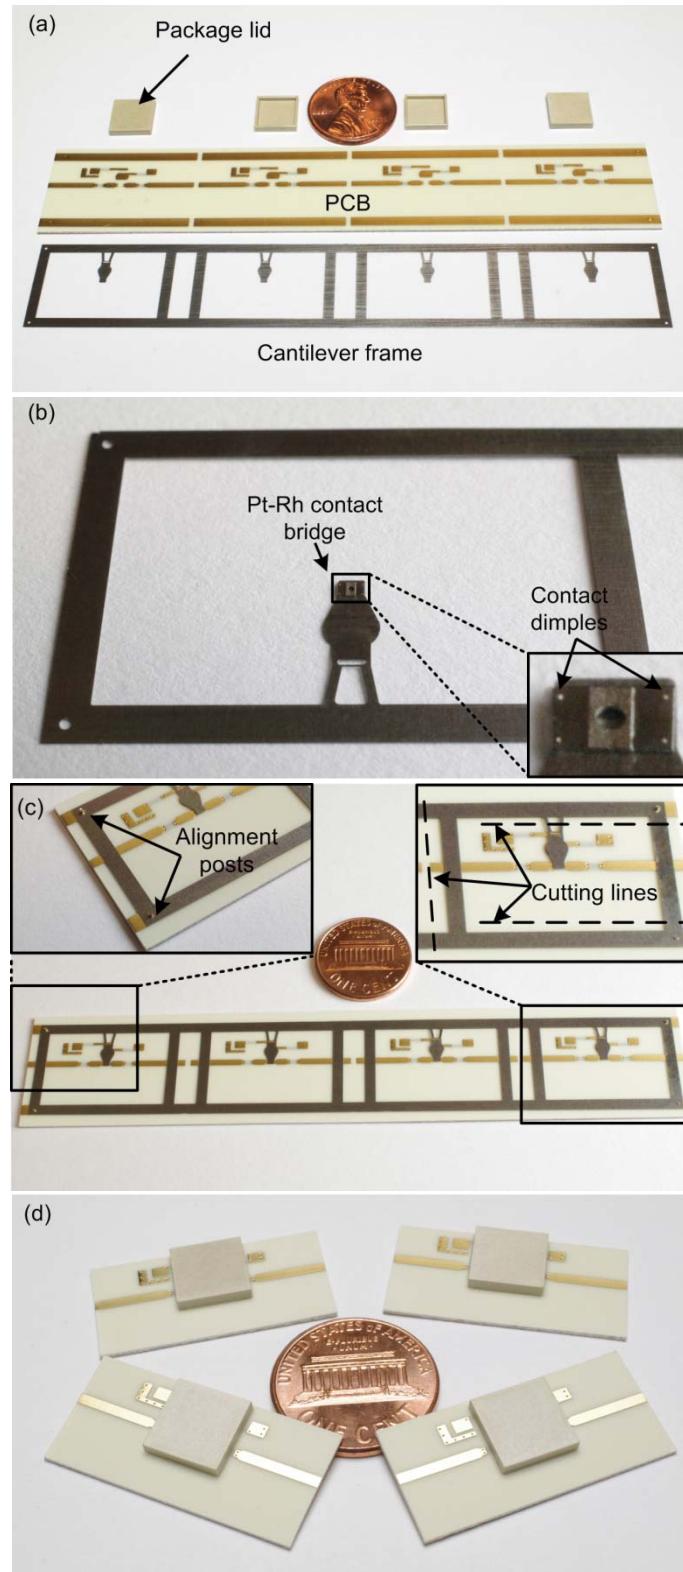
Assembly sequence for the batch RF micro-relay. (a) Individual components are shown. (b) Cantilever frames deposited with Parylene and assembled with contact bridges. (c) Cantilever frame-PCB assembly. (d) Packaged single devices.
